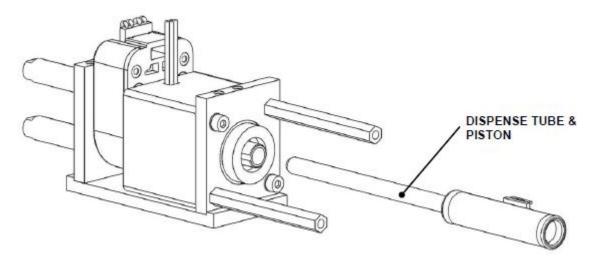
Sliding the Dispense Tube assembled on the Dispense Piston through the Barrel Centre
